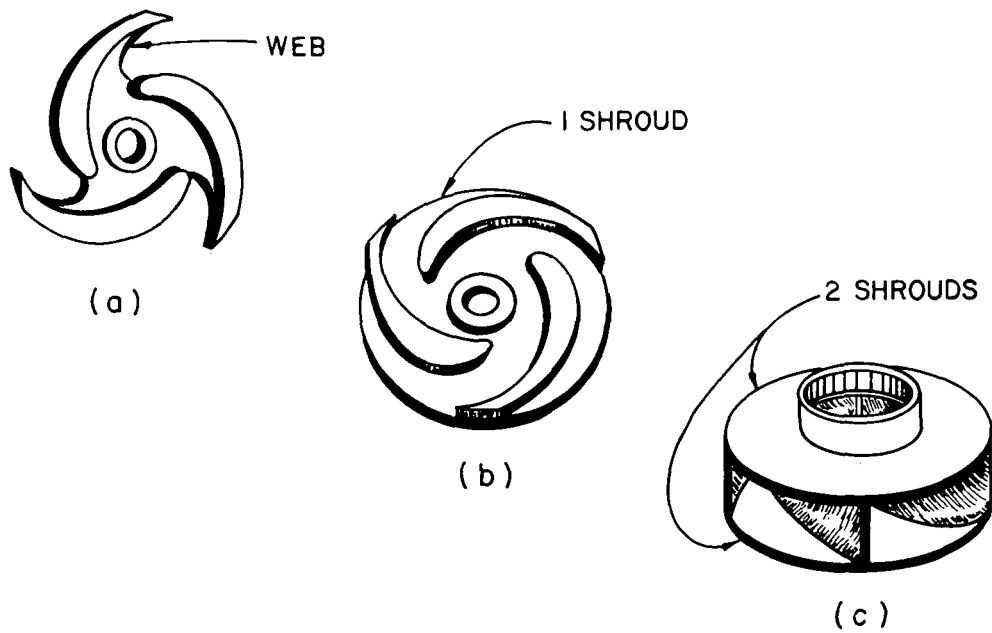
Impellers: (a) open, (b) semi-enclosed, (c) enclosed
